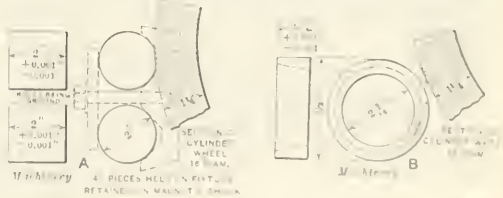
Examples of Roller Bearing Rolls and Race Ring Grinding
